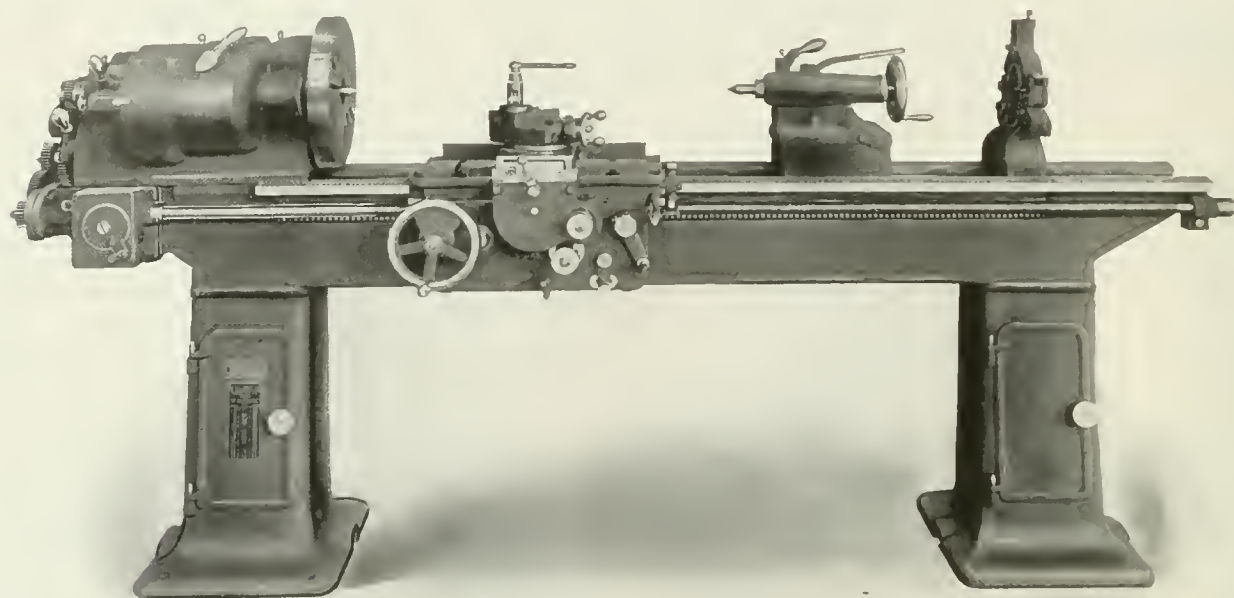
Latest Design of Schellenbach Geared Head Lathe
